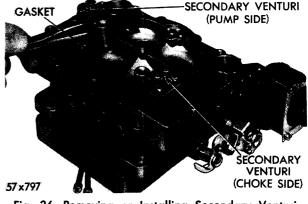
Removing or Installing Secondary Venturi (Choke Side and Pump Side)
